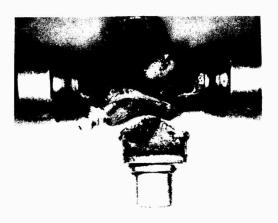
Broken Right Rear Wheel-Drive Shaft Outboard Universal Joint Cross On M151A1 after 2144 Test Miles.
